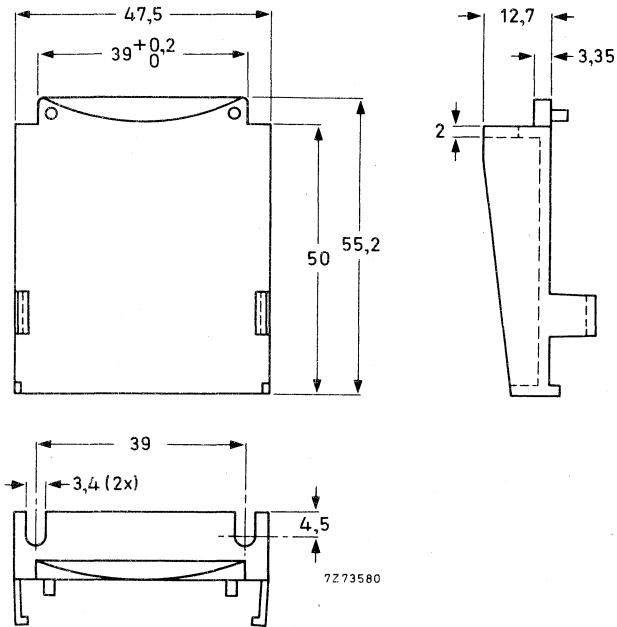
Male end-piece, T version, for mounting with screws to the panel.
